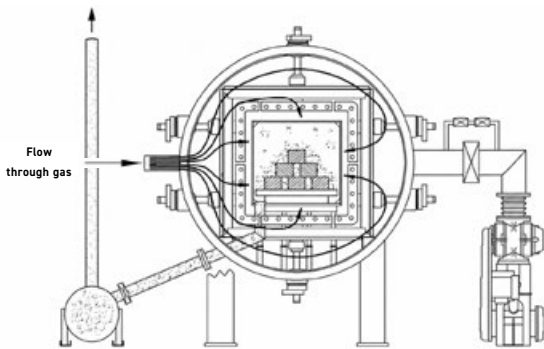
Positive pressure flow through with incinerator (Courtesy Centorr Vacuum Industries)
